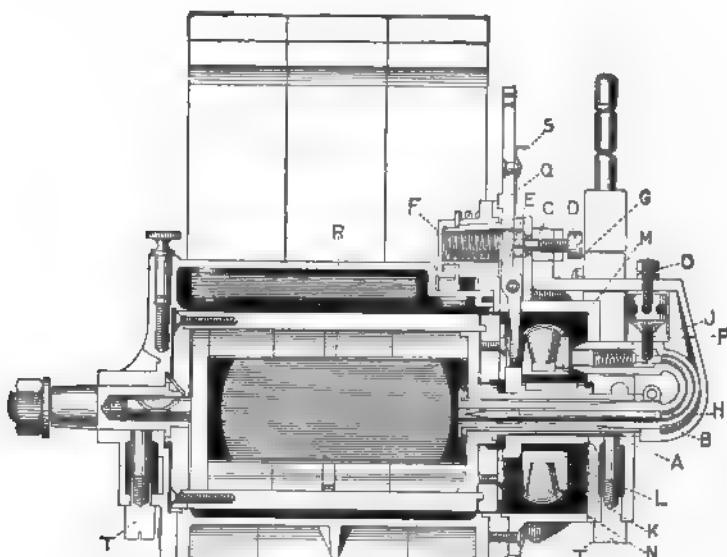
Section through the Simms-Bosch High-tension Magneto. A, armature shaft; B, curved arm carrying high tension lead; C, lug supporting screw, D, adjusting contact breaker, E, against spring, F; G, revolving sleeve carrying face cams; H, high tension load wire; J, carbon brush of distributor die; K, insulated ring; L, rotating drum of distributor; M and N, distributor brushes; O and P, safety spark gap; Q, swiveled lever for retarding or advancing the spark time; R, condenser; T, T, spring-pushed wick oilers for armature spindle.
